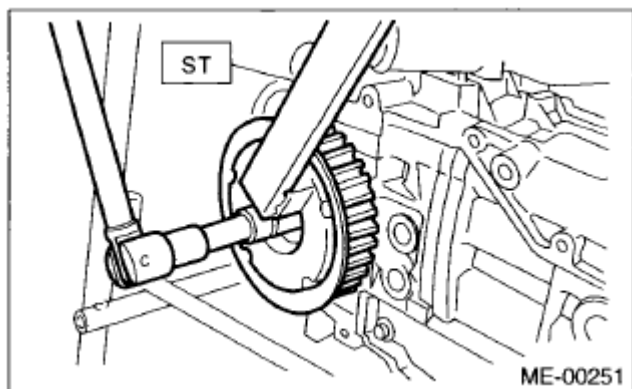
Tightening Cam Sprocket Bolt Using ST
